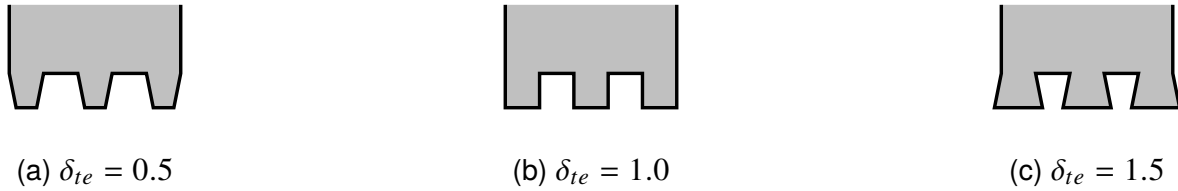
Tooth configurations with varying tooth edge offset (δ_{te}), tooth shape factor ($\alpha = 1.0$), tooth edge fillet $f_{te} = 0.0$, and tooth base fillet $\delta_{te} = 0.0$.
